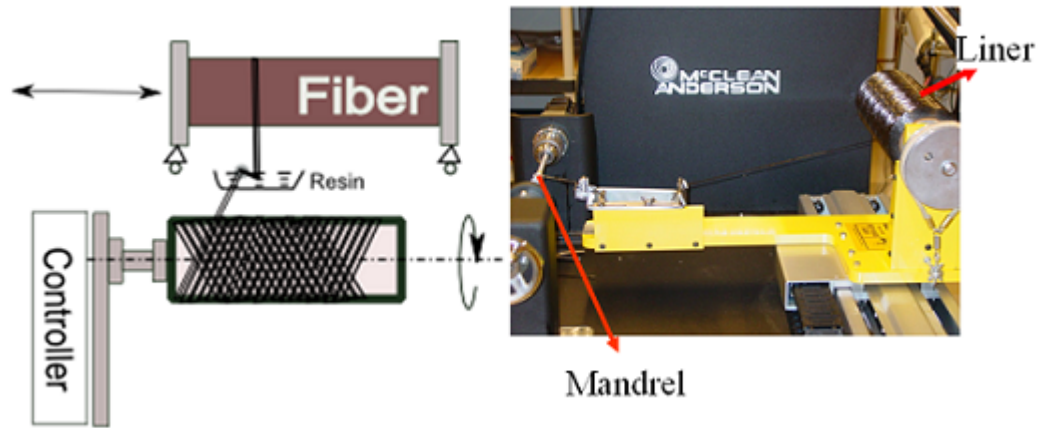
(Left) Schematic of the winding process in the filament winding machine; The mandrel rotates, winding the fiber around the liner. The stage moves to position the fiber along the liner. (Right) Filament winding machine setup.
